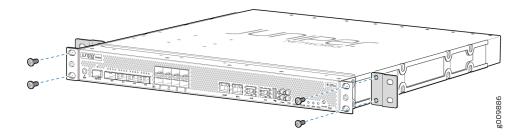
Attaching the Front-Mounting Brackets to the Switch Chassis
